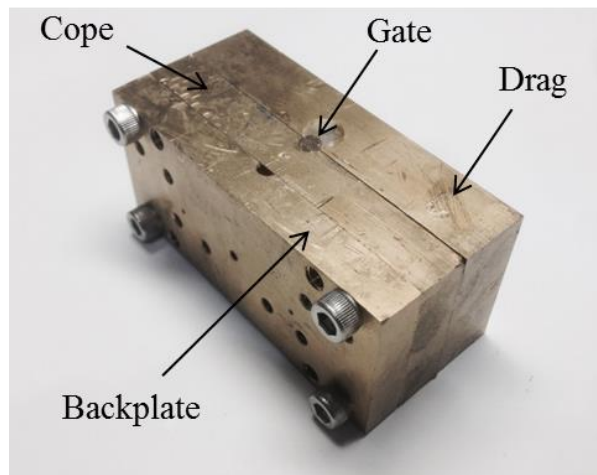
The three part mold was assembled and fastened with bolts and dowel pins.
